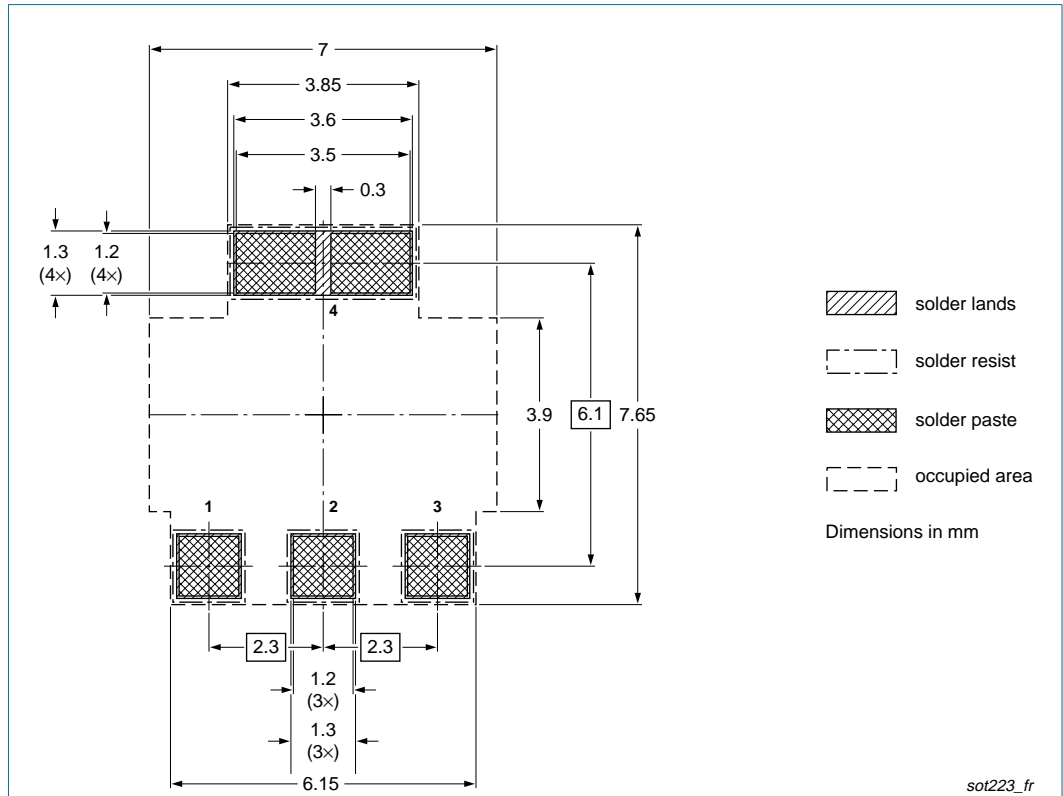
Reflow soldering footprint SOT223 (SC-73)
